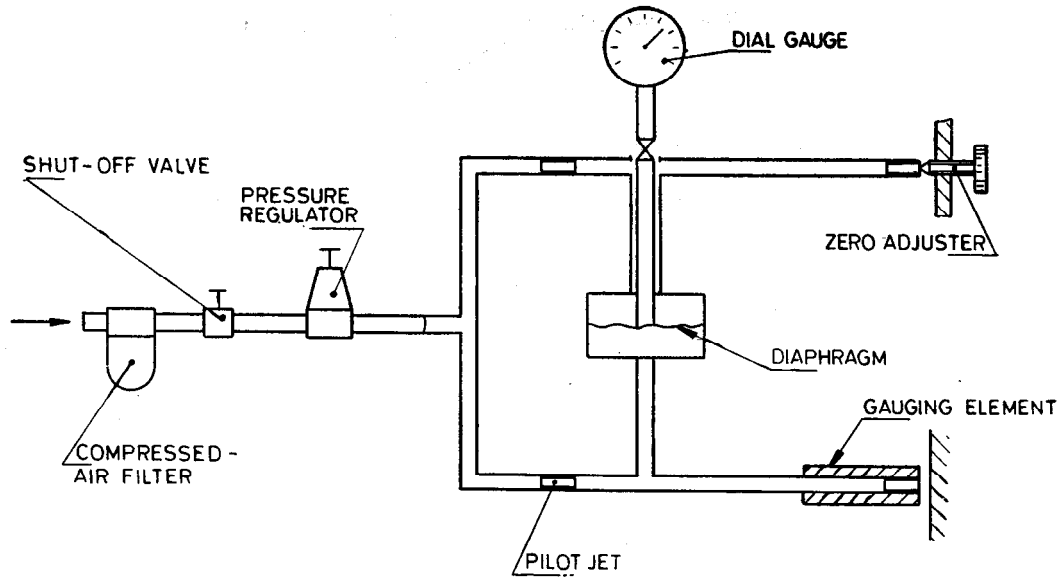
INDICATING INSTRUMENT USING THE PRESSURE MEASURING METHOD WITH A DIAL GAUGE
